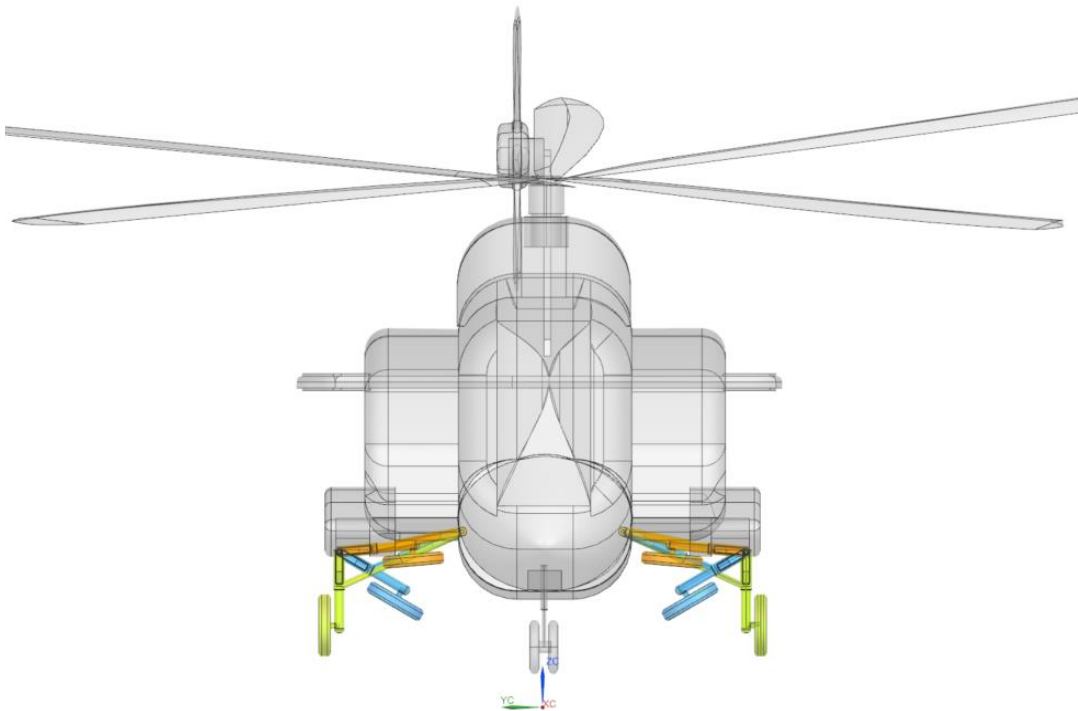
Helicopter CAD Model with RRPR Mechanism, Front View
